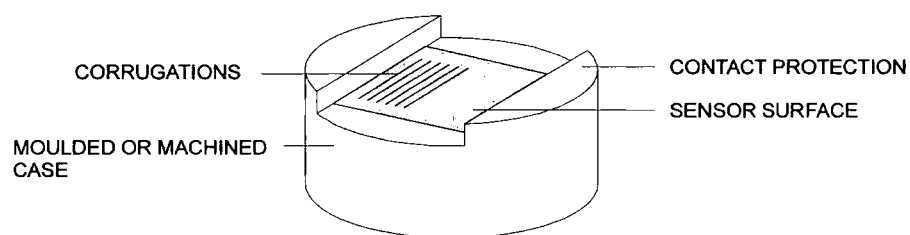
The proposed shape of a package incorporating flexible PCBs.
